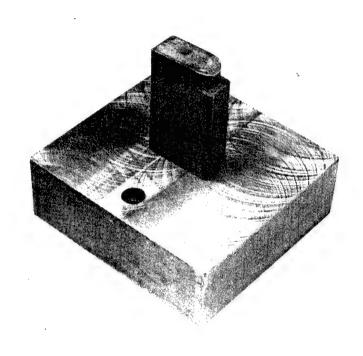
Pin-end Crimp-former Punch Installed on Pressure Plate to Prevent Cocking During Pin-end Shaping Operation
